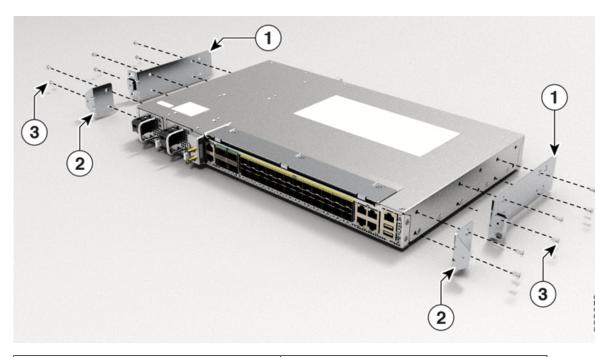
Installing Cable Management and 19 inch Rack-Mount Brackets in the Front
